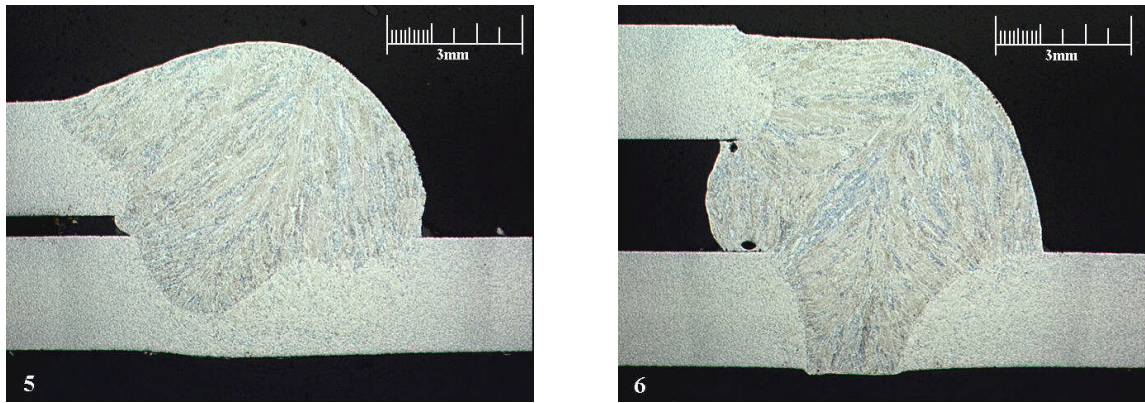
Developed Weld Area for the 2.4-mm Mild steel Sheet Applied to a 0T Joint Gap (left) and 1T Joint Gap (right) using 8.8 m/min WFS and 0.76 m/min TS
